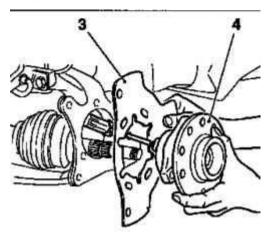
Removing the protective cover: 1 - the wiring harness connector, 2 - mounting screws, 3 - blade guard, 4 - wheel bearing module
